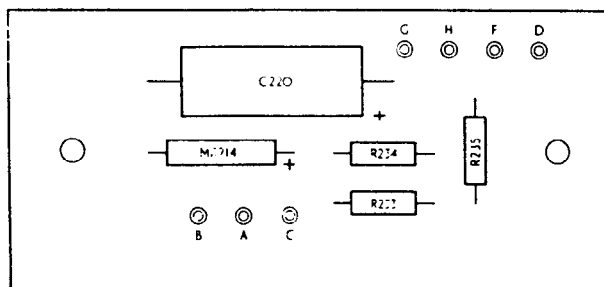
AF Gain Control Board P28427—Component Layout
